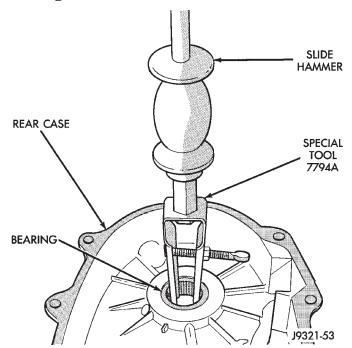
Front Output Shaft Rear Bearing Removal REPLACING FRONT BEARING
